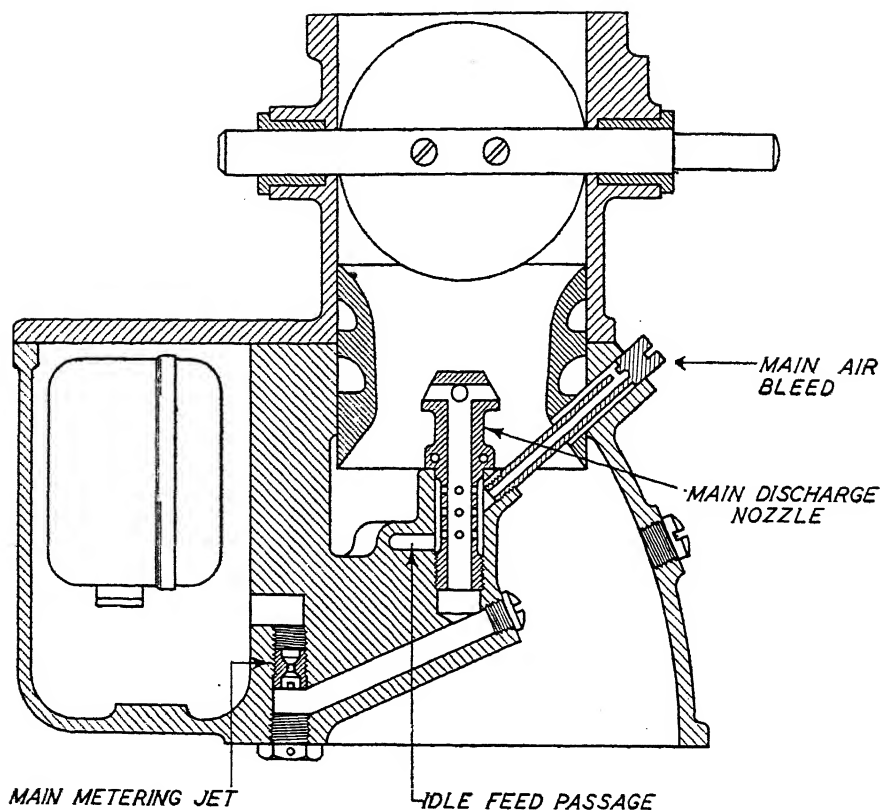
A.—MAIN DISCHARGE ASSEMBLY
